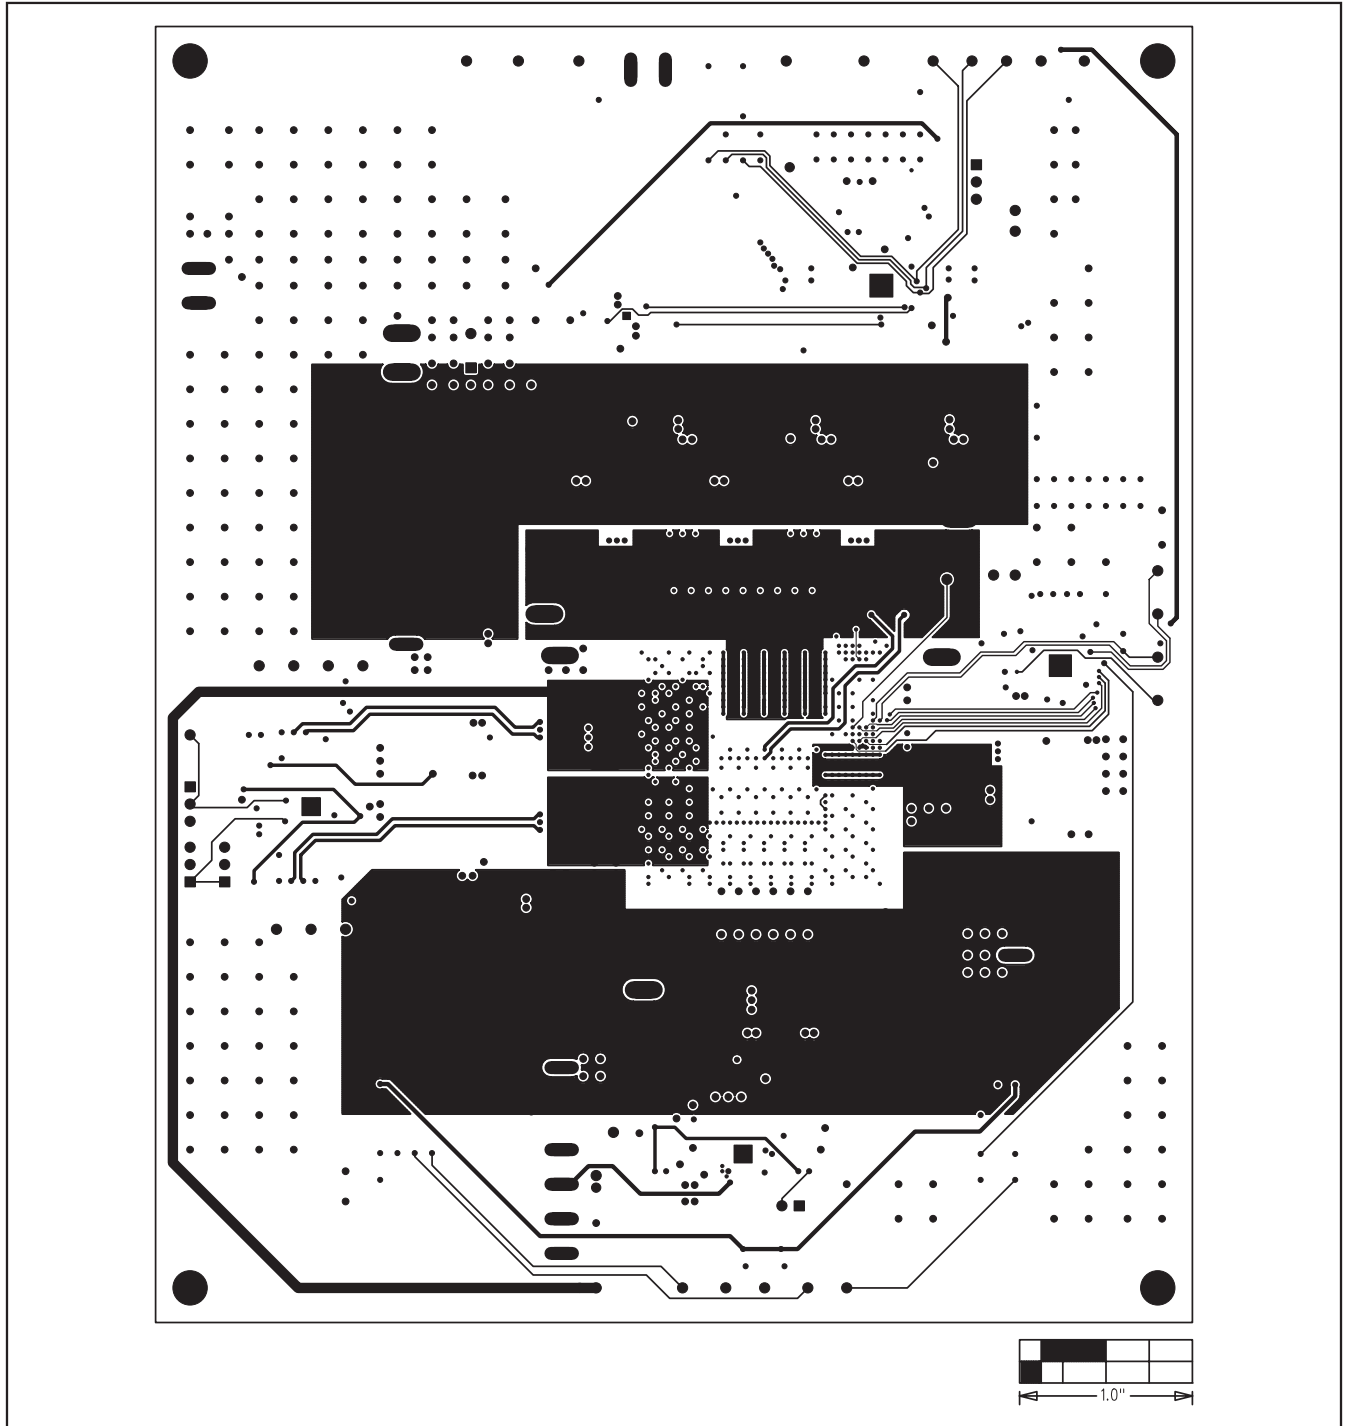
MAX17030 EV Kit PCB Layout—Internal Layer 3 (Signal Layer)
